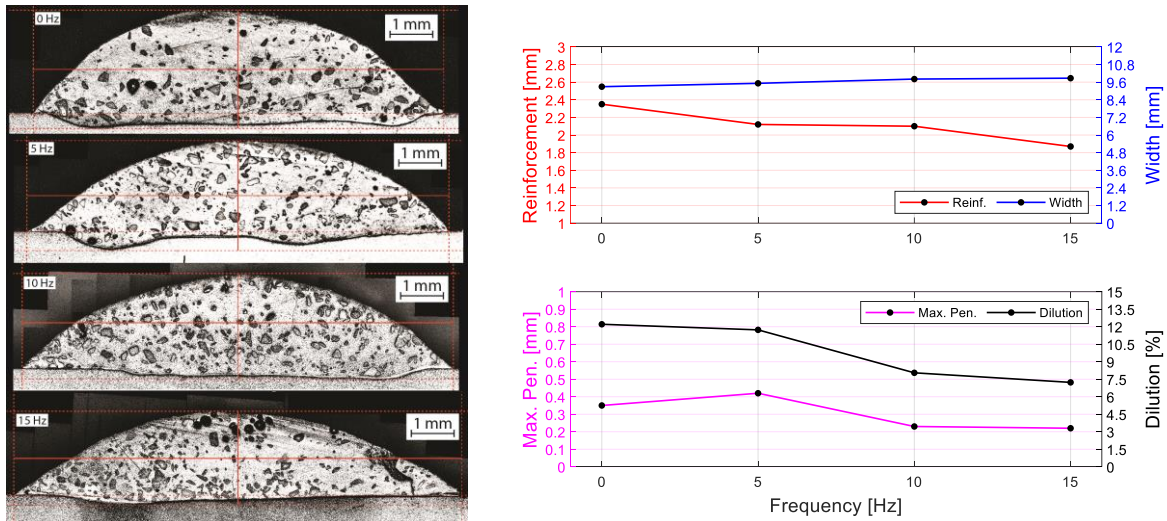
(Left) Weld bead cross section macrograph's. (right) Weld bead geometry graphics.
